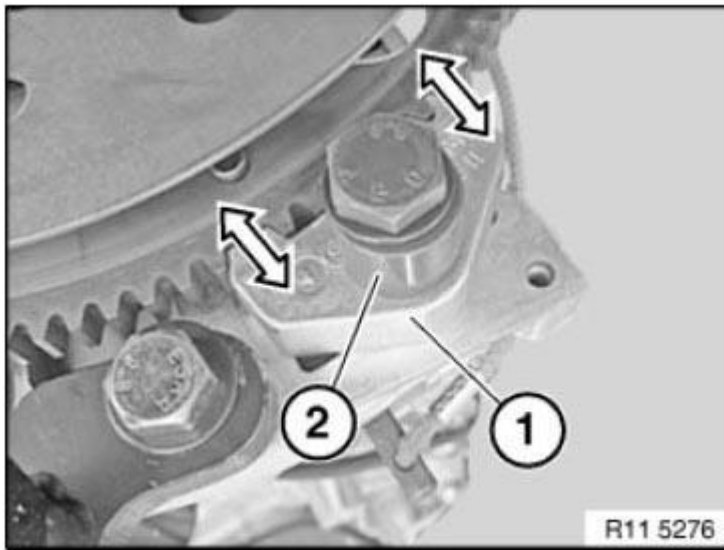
Securing Flywheel Using Special Tool 11 9 260 And Special Tool 11 9 266
